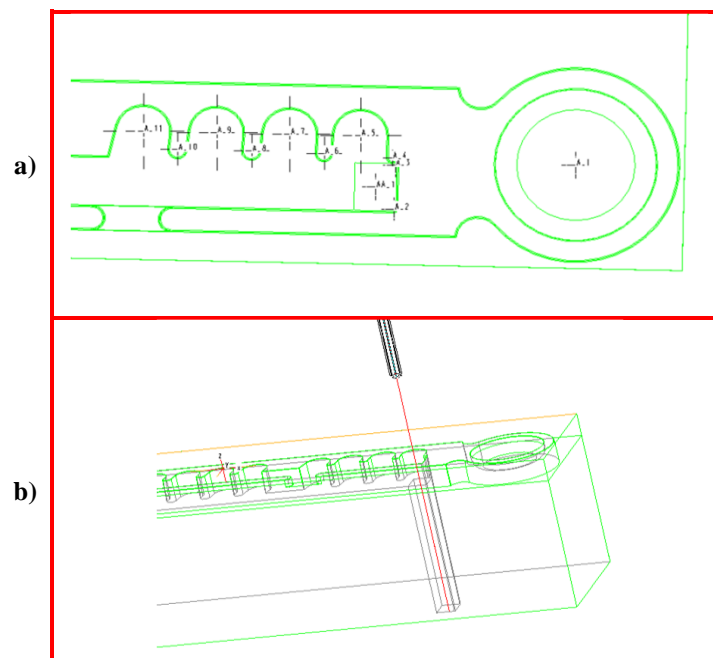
The simulation of drilling hole in the workpiece: a – holding of the axis in the center of the workpiece; b – a choice the axis and the depth of drilling for execution of the sixth machining step.
